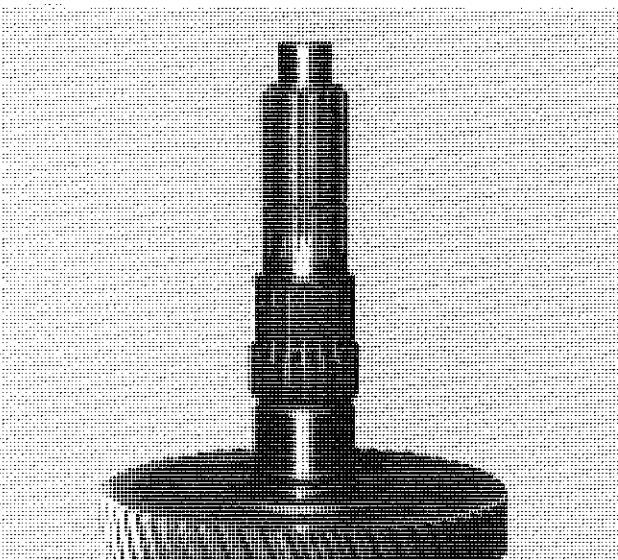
1st Speed Gear and Caged Needle Bearings
